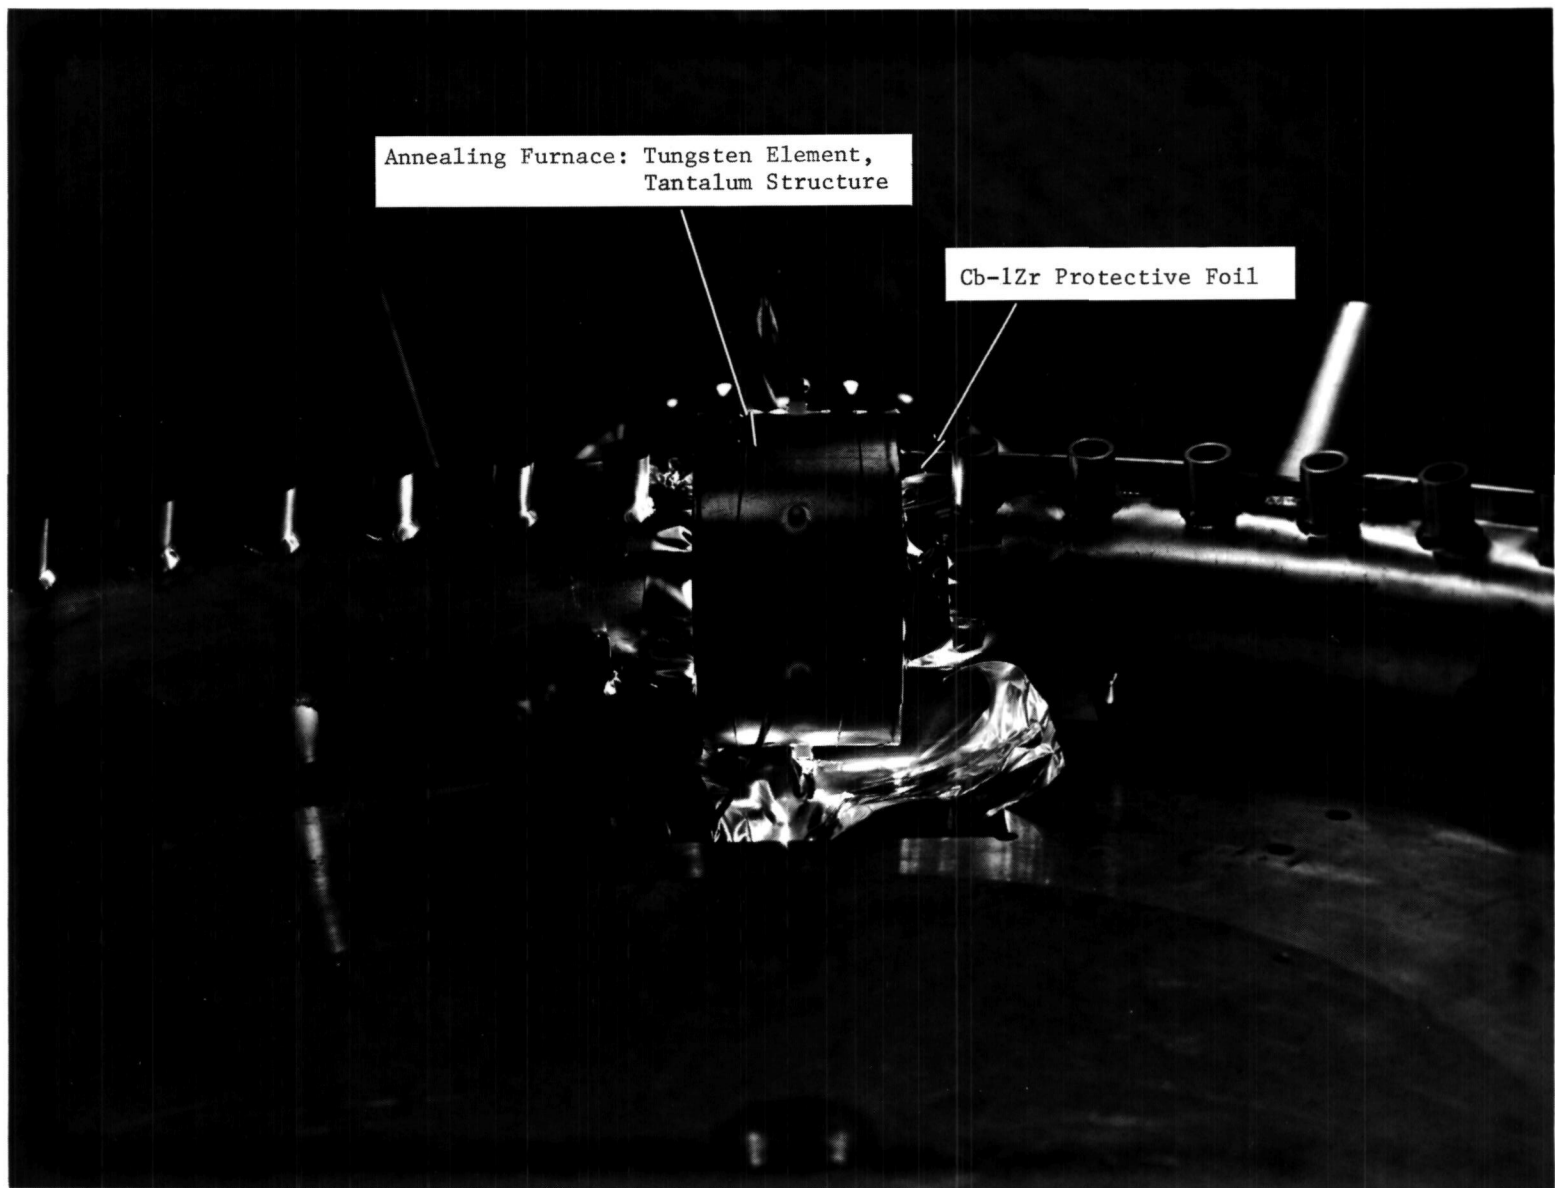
Typical Manifold Girth Joint Postweld Anneal Using Local Furnace. (P69-7-45)
